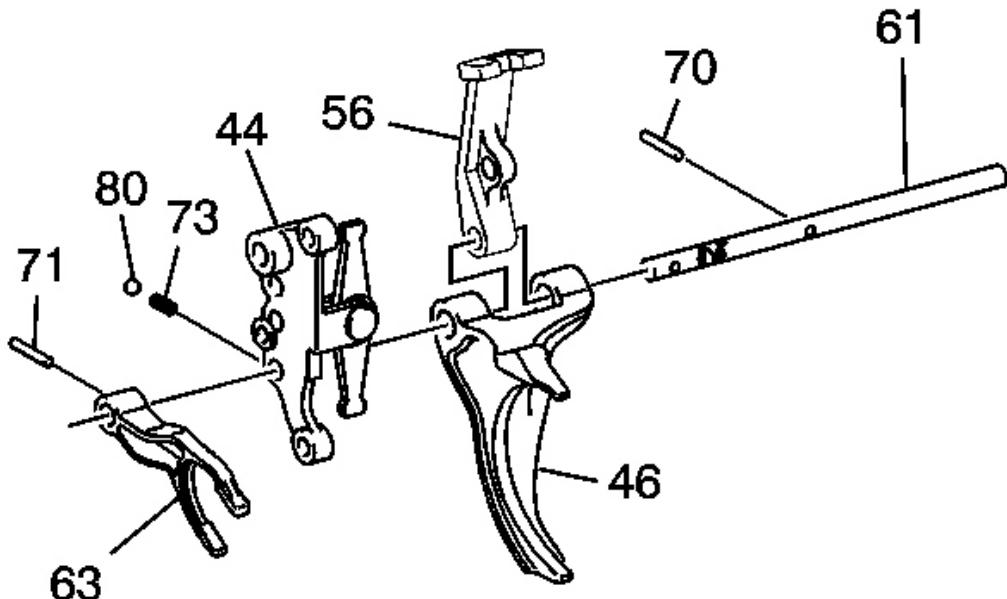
View Of 1st/2nd Shift Fork Assembly, Reverse Shift Shaft & Components
